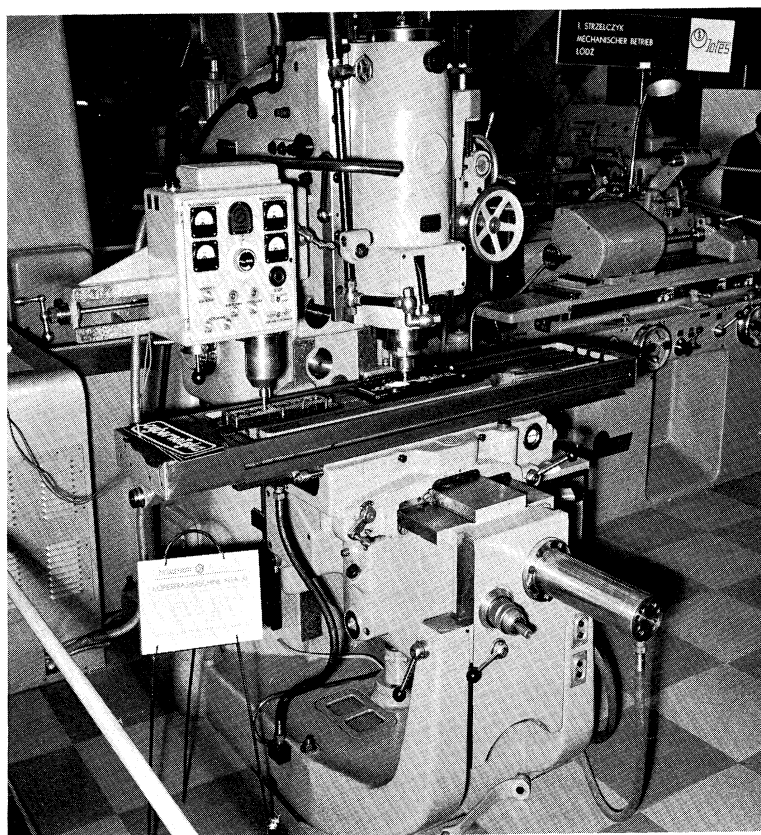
FGA Milling Machine manufactured in Warsaw, Poland with electronic copying controls.
